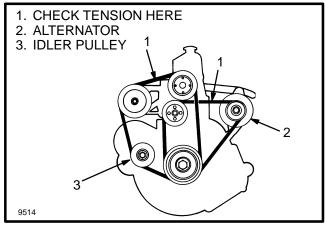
CHECK AND ADJUST DRIVE BELT TENSION (MAZDA ENGINE)
